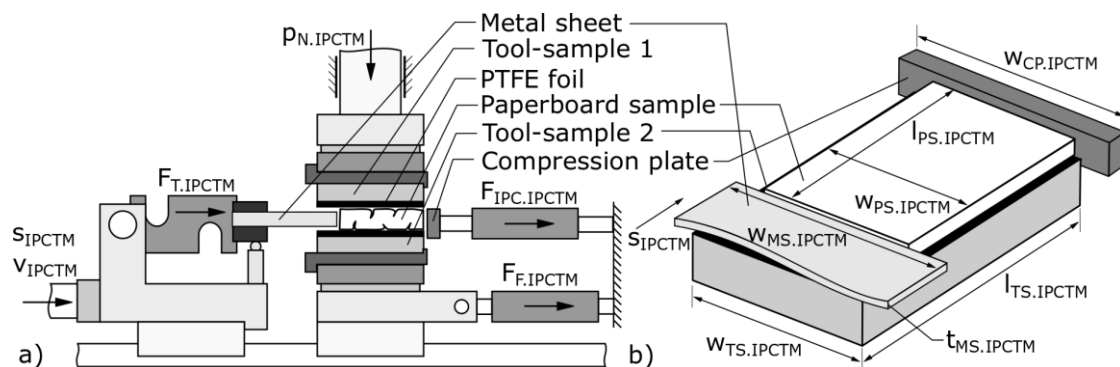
a) Schematic side-view of the in-plane compression testing method (IPCTM) with tool-samples prepared with PTFE-foil; b) Schematic detail-view of tool-sample 2, the paperboard sample, the compression plate and the metal sheet
